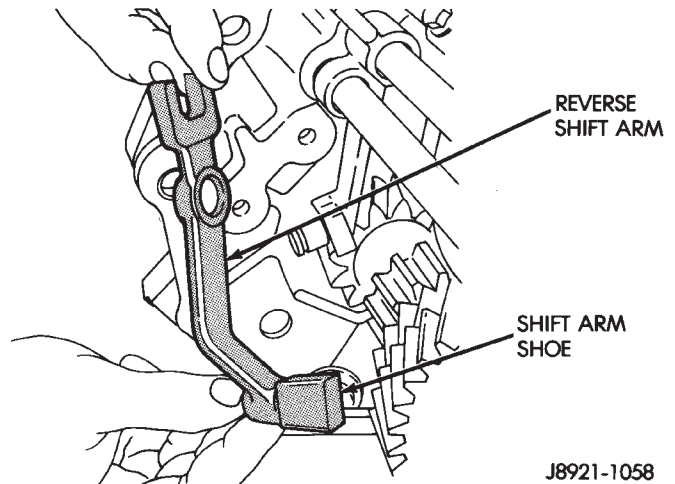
Removing Reverse Shift Arm E-Ring
